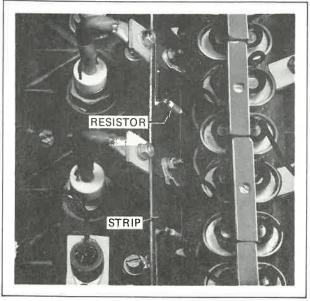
RECTIFIER PANEL SHOWING EARLY "TELL-TALE" RESISTORS SOLDERED TO MOUNTING STRIP.
